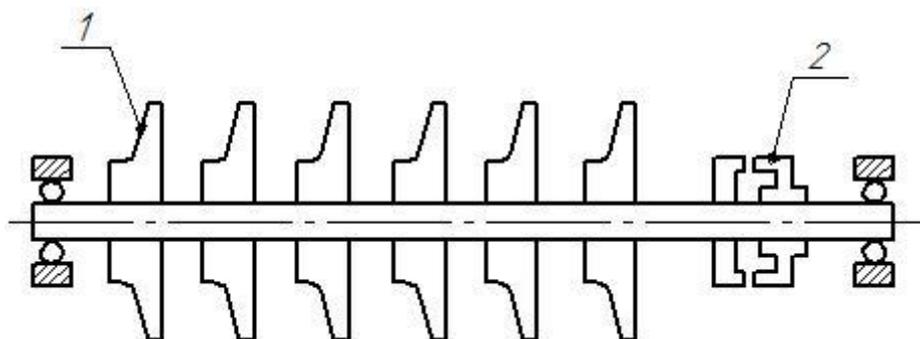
single-suction hydraulic scheme. 1 - impeller; 2 - Handling device (hydraulic balancing device).
